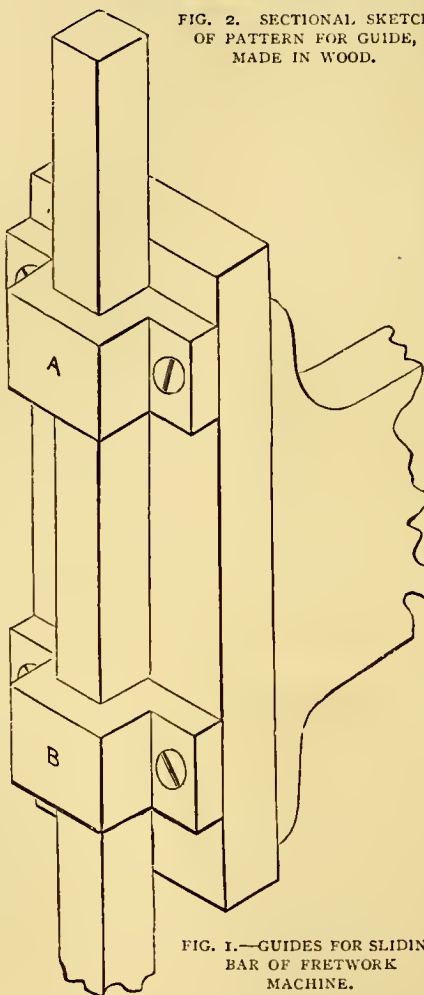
GUIDES FOR SLIDING BAR OF FRETWORK MACHINE.
